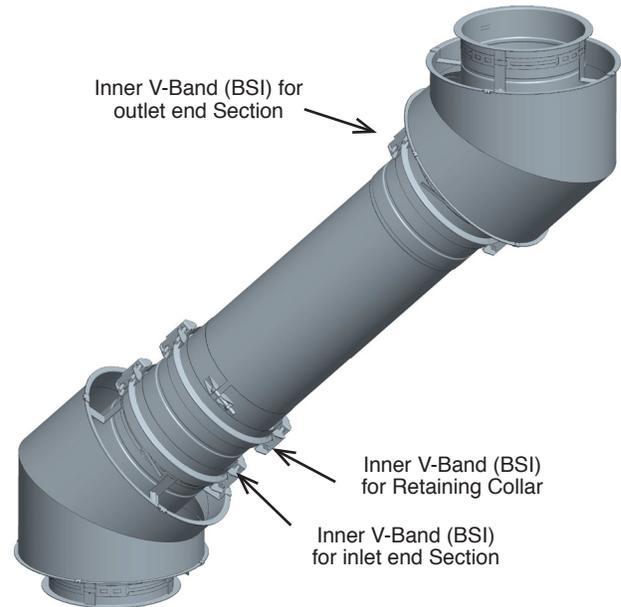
Step 10-11 - Secure the Retaining Flanged Band
